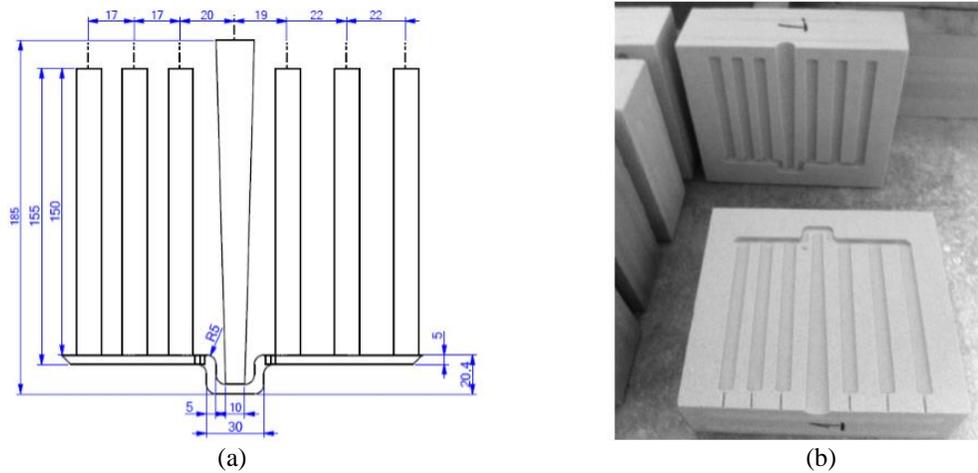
a) The dimension of the mould b) The sand mould used in the casting trials
